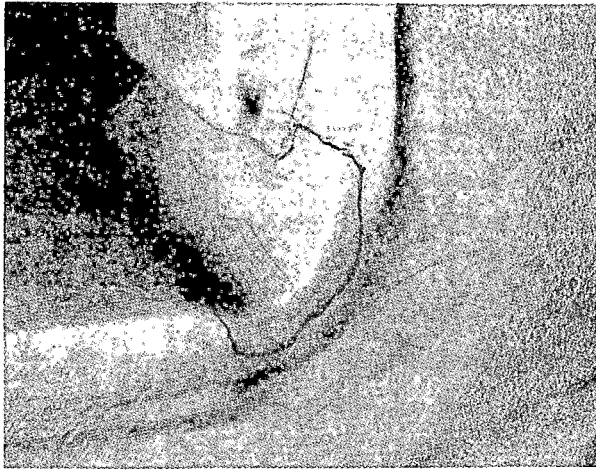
Static stresscoat pattern; pattern developed by static load applied to outer pedestal at roller-bearing centerline
